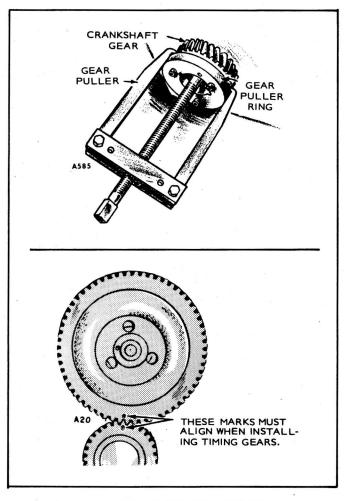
TIMING GEAR REMOVAL AND INSTALLATION
